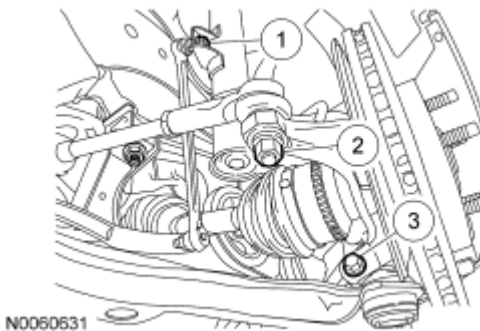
Identifying Sway Bar Link, Nut And Bolt
